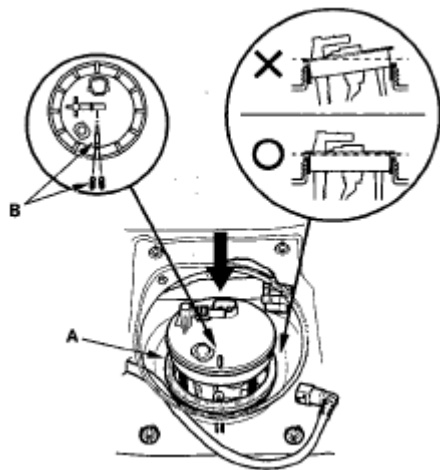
Setting Base Gasket Fuel Tank Unit To Fuel Tank
